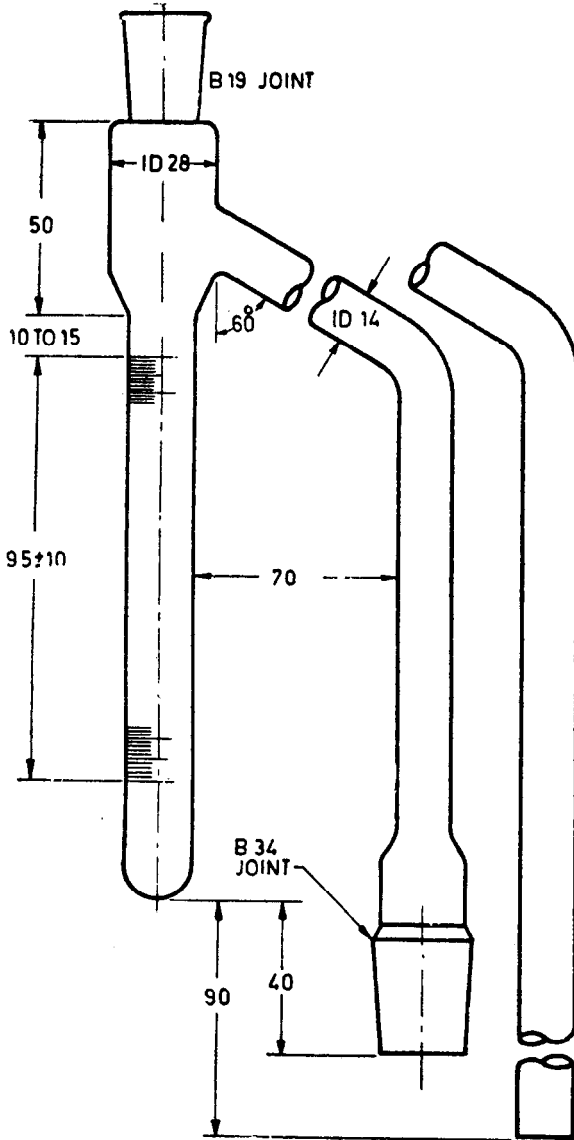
TYPICAL ASSEMBLY WITH GLASS STILL
